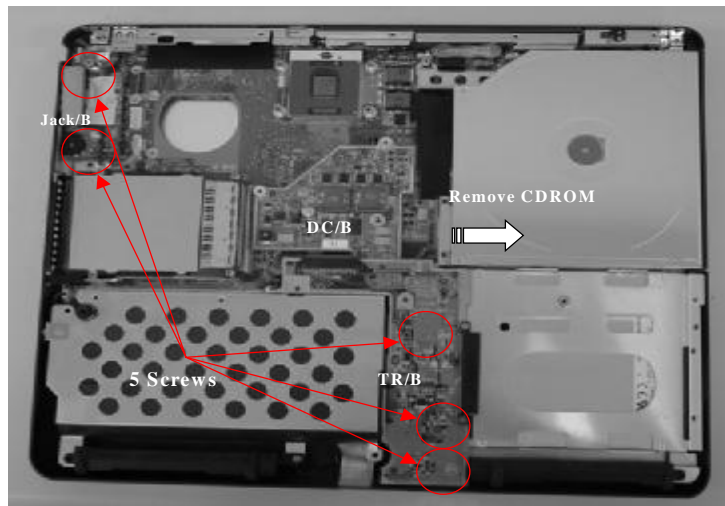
DC-DC Board , Jack/b , R/B Assembly
